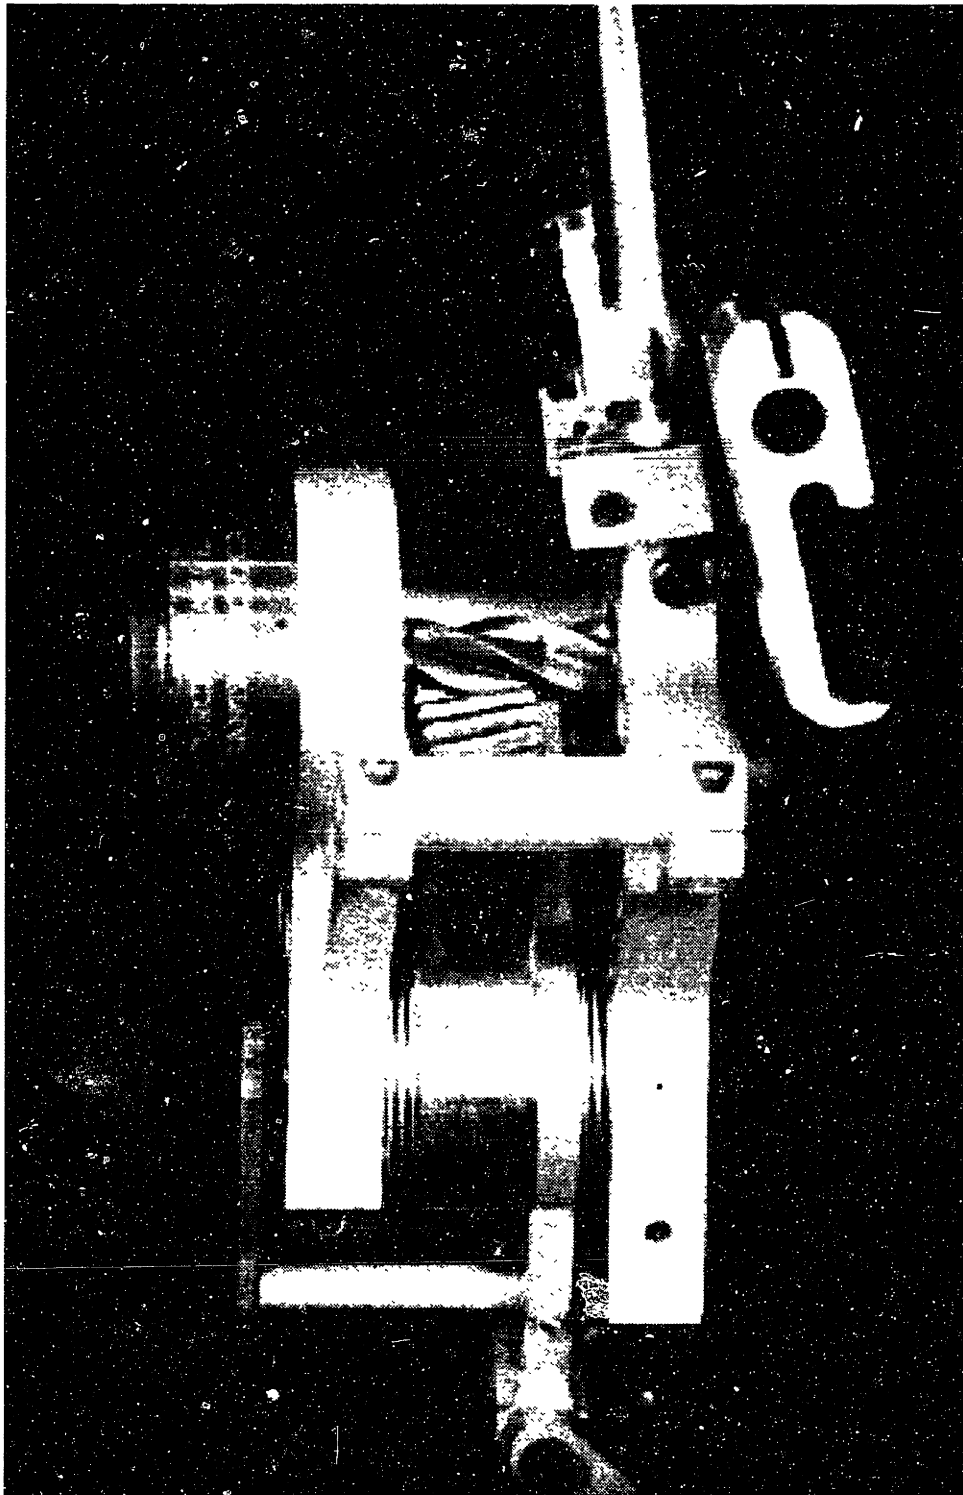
CBO knee joint showing the magnetic particle brake and Evoloid gear and pinion.
